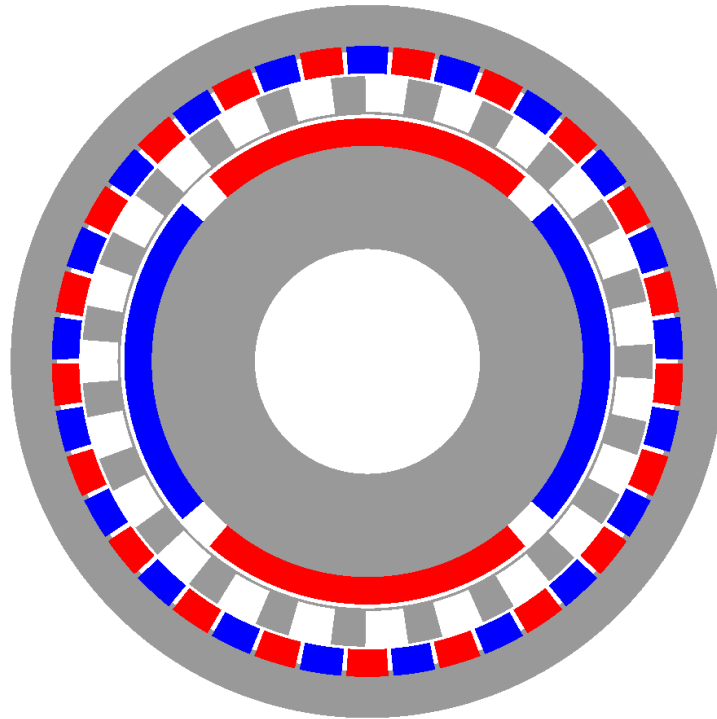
Cross-sectional view of the prototype magnetic gear.
